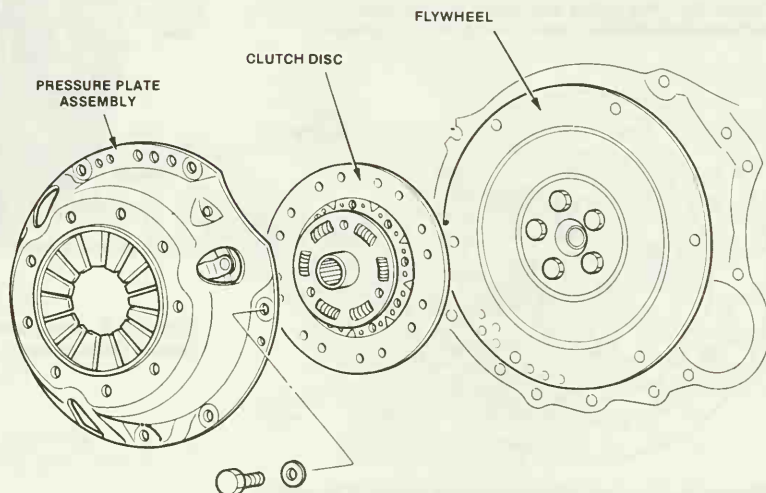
The three main parts of a clutch assembly. (Nissan Motor Corporation in USA)
